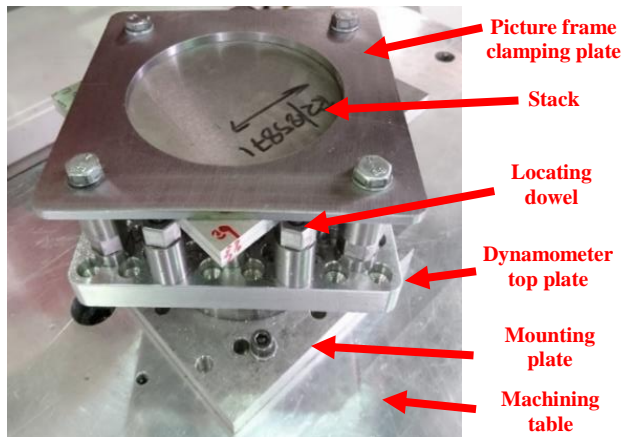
Picture frame fixture, force dynamometer (hidden) and mounting plate
